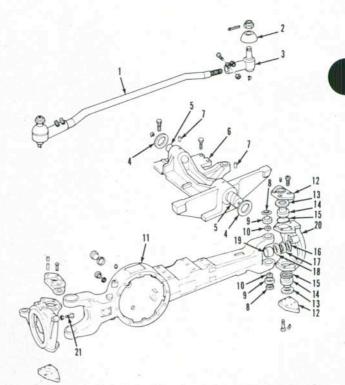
Exploded view of front axle housing and steering knuckle used on APL-3054 type axle.
